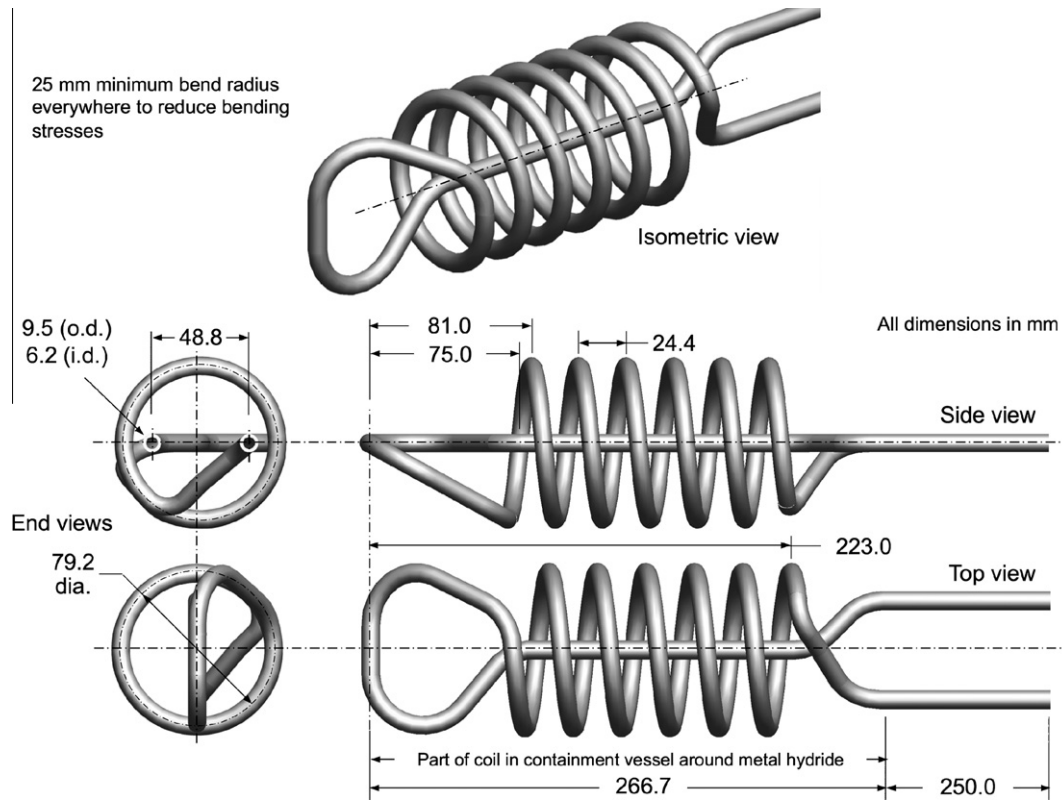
Isometric view and detailed drawings of coiled coolant tube.
